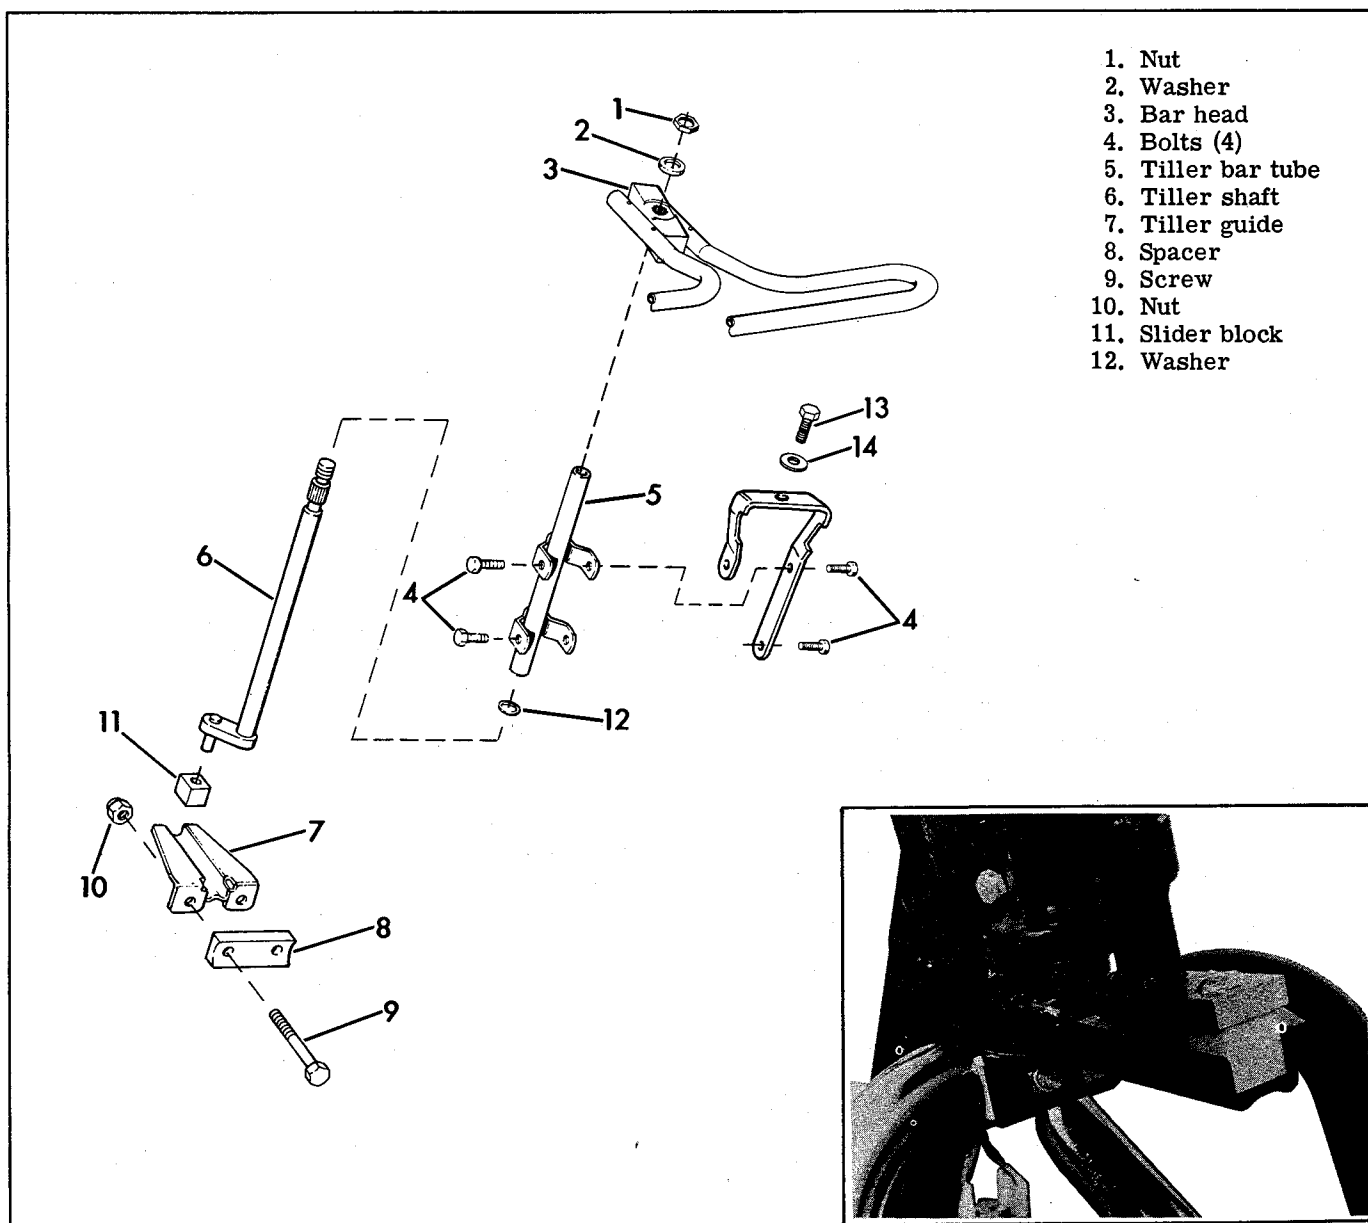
Tiller Steering (1974 & Later) - Exploded View
